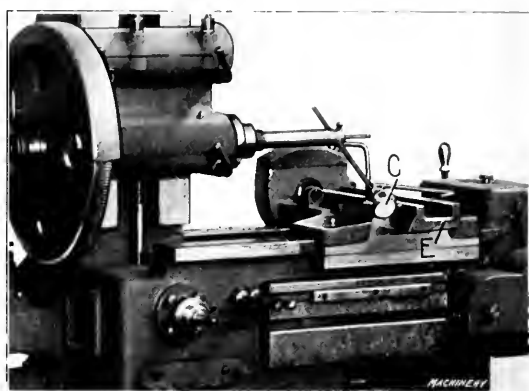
Determining if Cutter-spindle Slide is at Right Angles to Spindle
